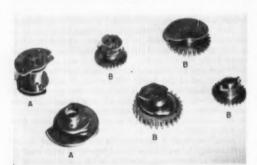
CAM-AND-GEAR CLUSTERS FOR BUSINESS MACHINES
